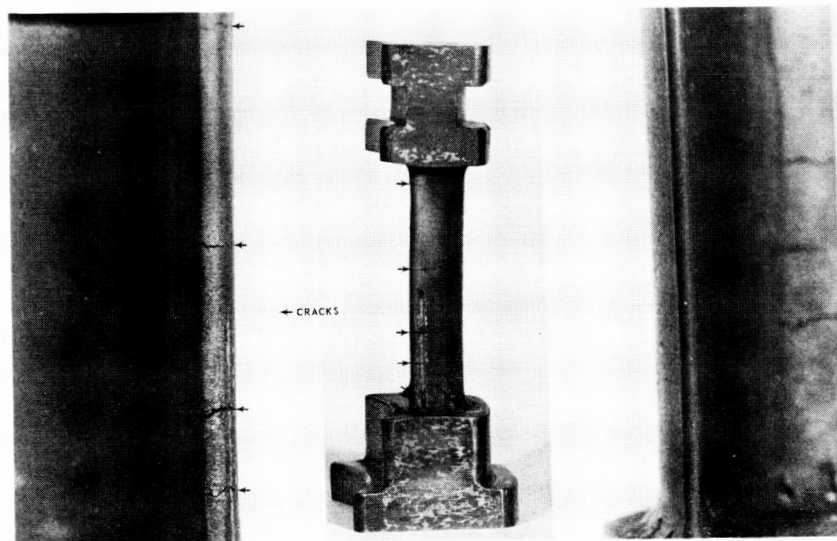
Scrap PWA 663 Film Cooled Blade Specimen After Test No. 4
